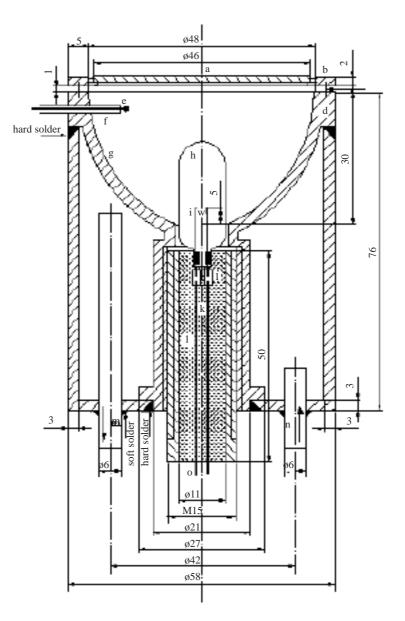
Block diagram of the heater (all dimensions are in millimeters): a) Ni Holder; b) Stainless steel ring; c) Four Ni-Cr wire supports; d) Brass block; e) K-type (chromel-alumel) thermocouple; f) Ceramic tube; g) Ni-Cr plated parabolic cavity; h) 250 W halogen bulb; i) Bulb filament at the focus of the paraboloid cavity; j) Crimped copper tubing; k) Copper wires; l) Cement filled bulb holder; m) Cooling water outlet; n) Cooling water inlet; o) Electrical feedthroughs.
